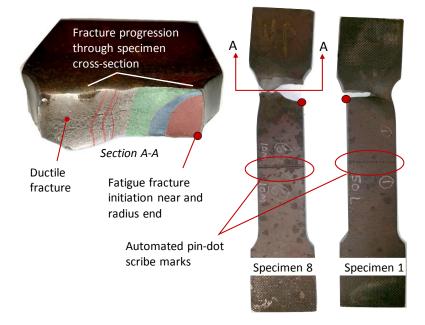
Location of fracture initiation for Specimens 1 and 8 and fractured steel surface.
